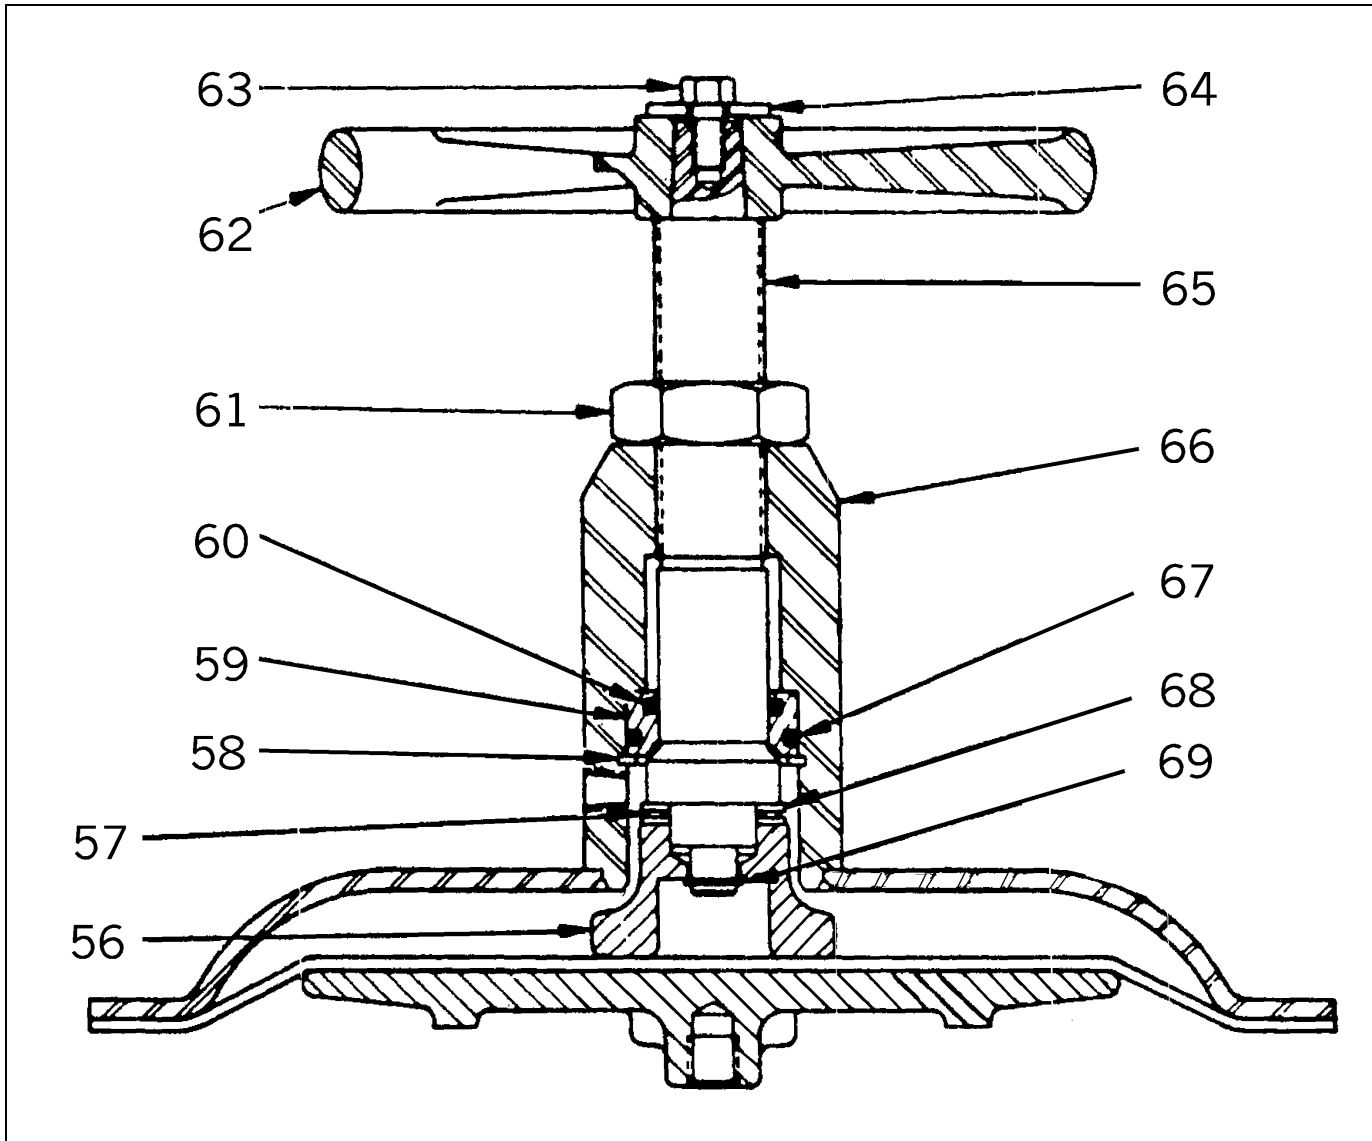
Top Mounted Handwheel for Type 01 Air-O-Motor
